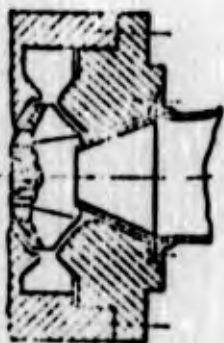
Centrifugal wheel with the cone at the inlet.
